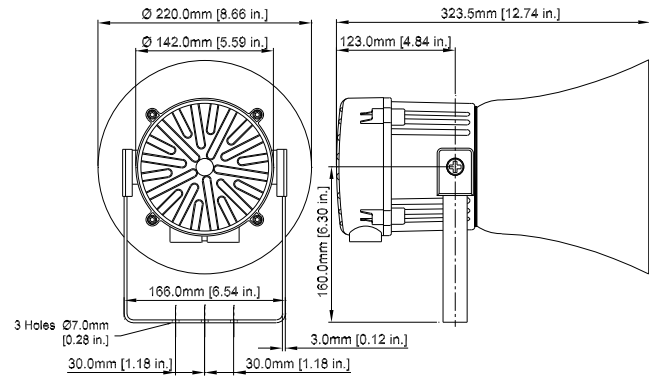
Fixing Location for Loudspeaker L25 Flare
